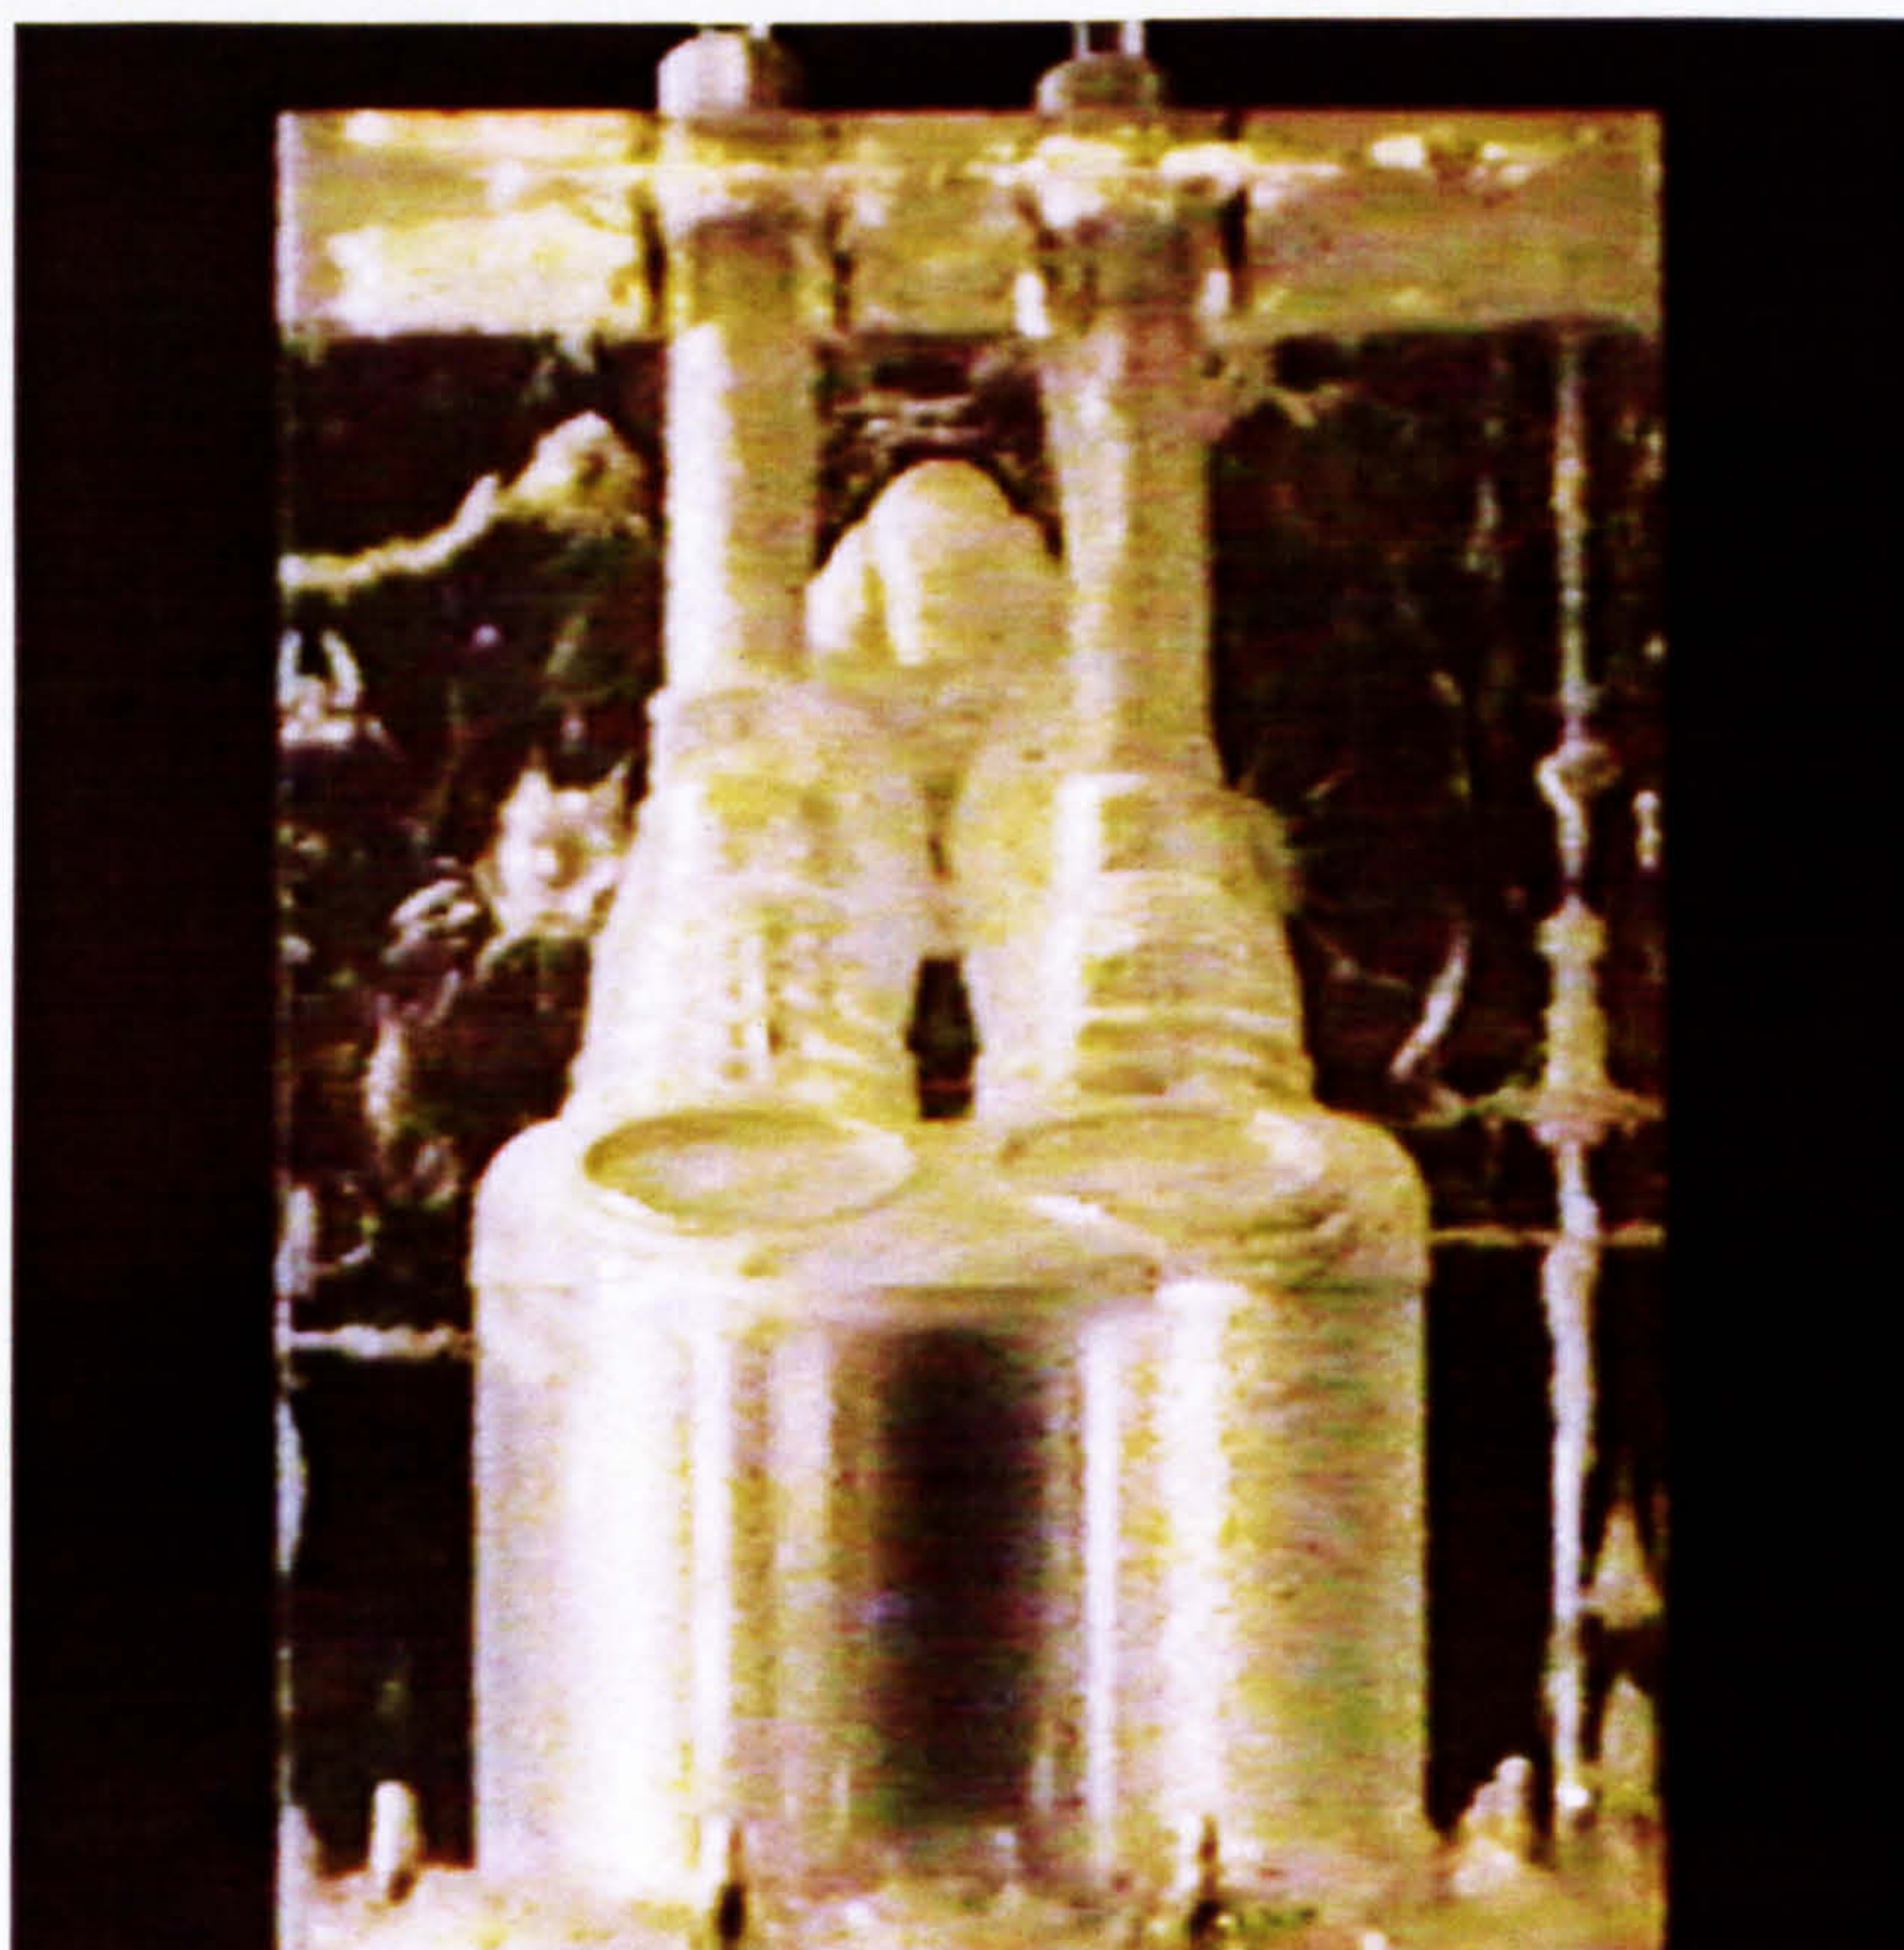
(b) Fusible alloy mould used to cast Perspex engine model
